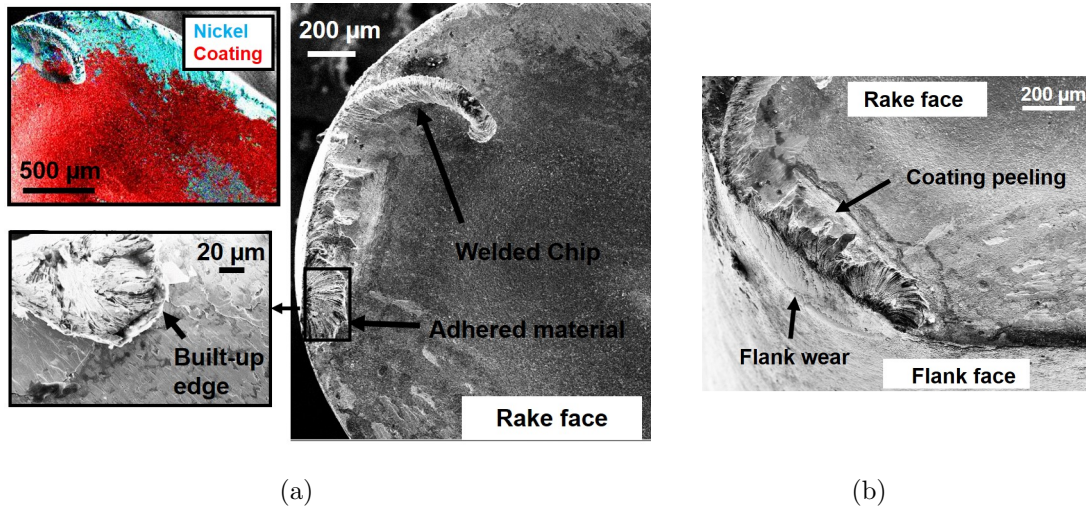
SEM observations of the tool wear after 13 min of machining in LN₂ condition during Test 1: (a) Rake face/EDS analysis; (b) Flank face.
